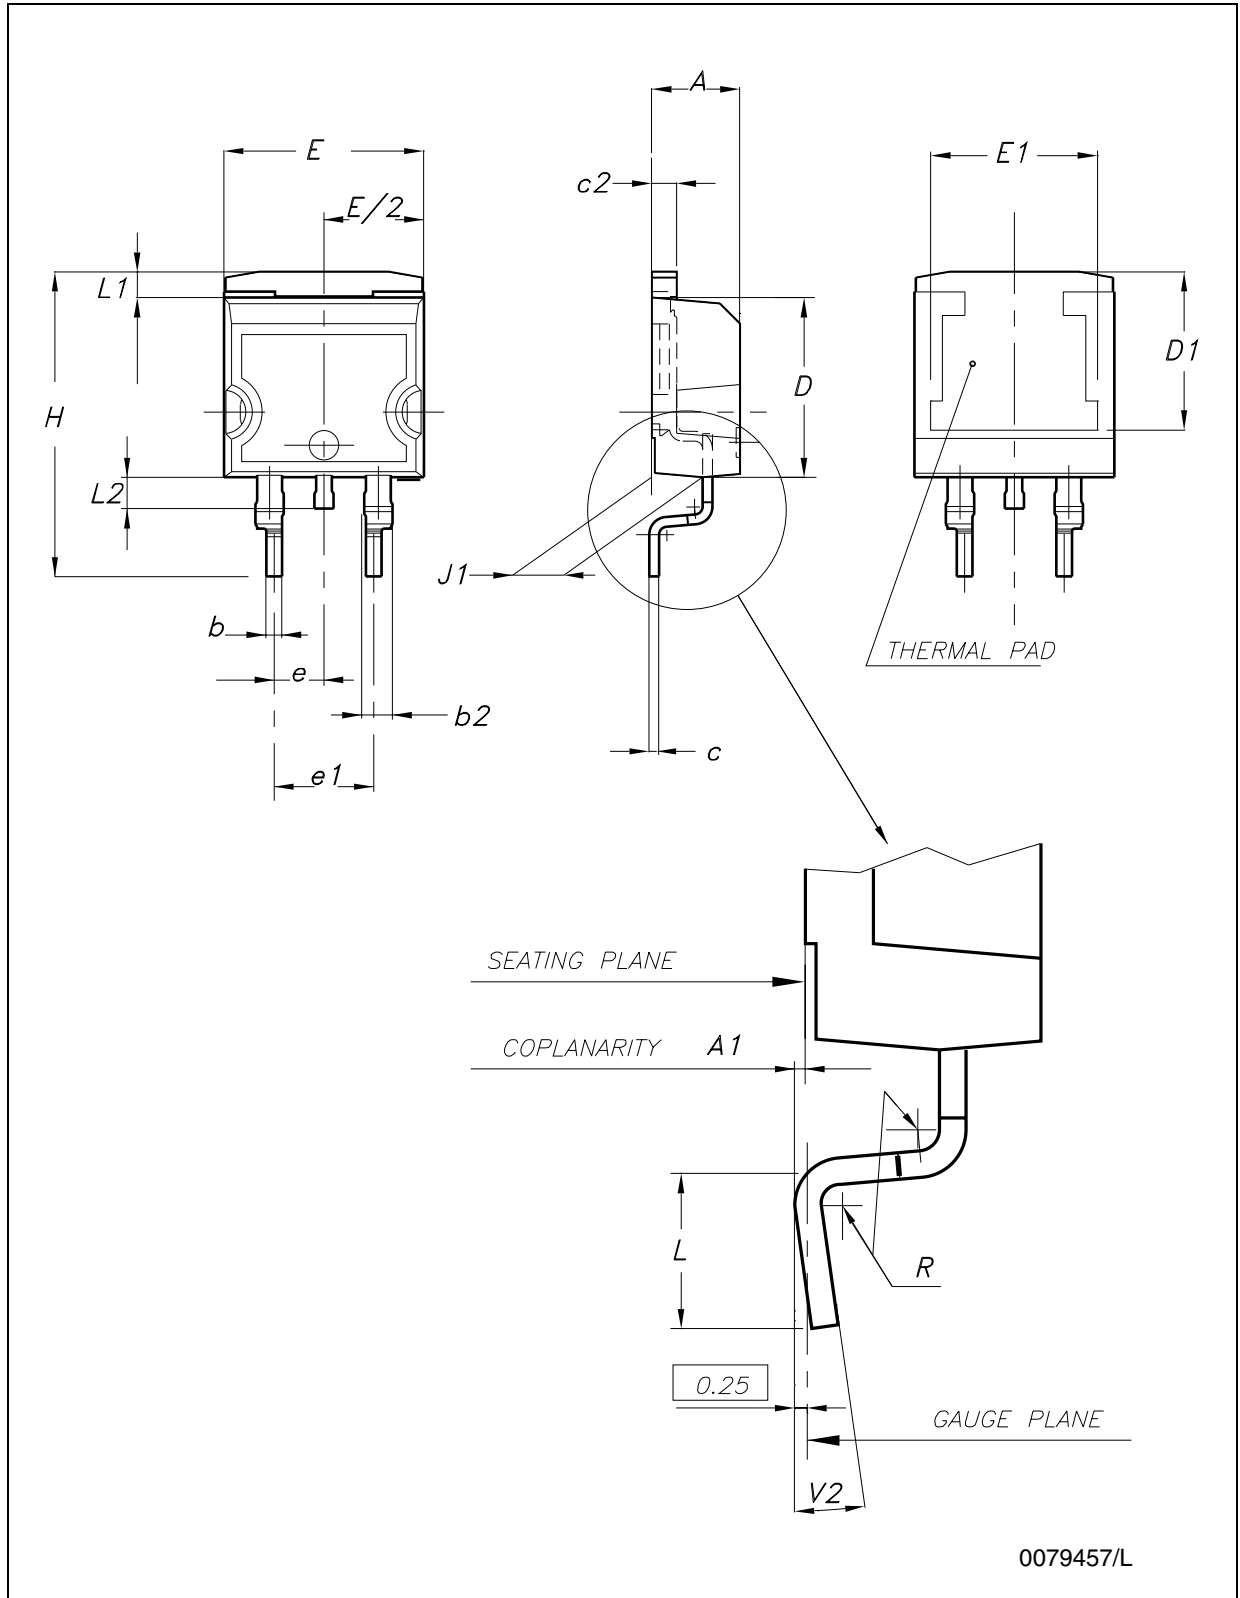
Drawing dimension D<sup>2</sup>PAK (type WOOSEOK-Subcon.)
